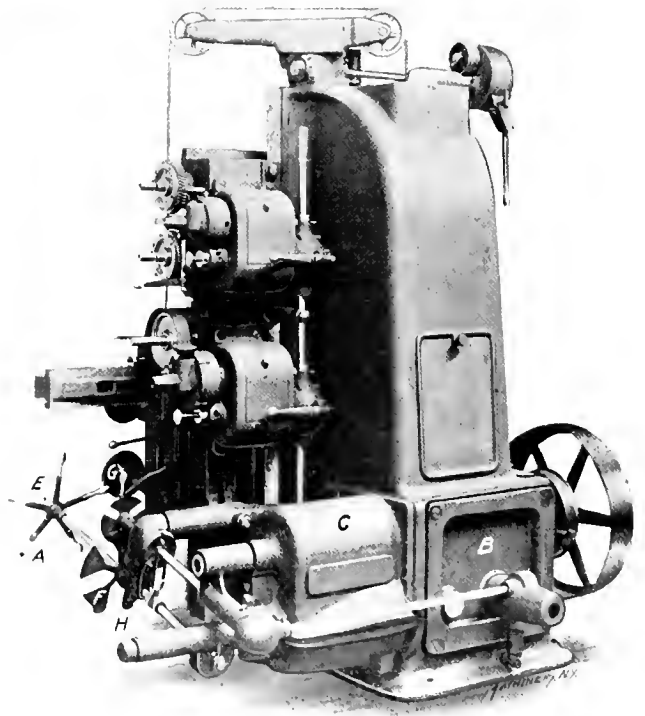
Rear View of Vertical Turret Lathe, showing Spindle Speed Changing Device.
